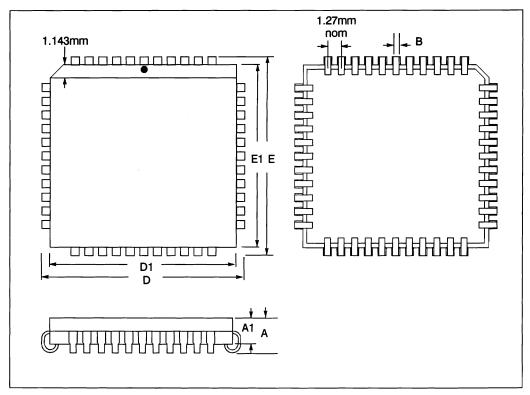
IMS G176 44 pin PLCC J-bend package dimensions
